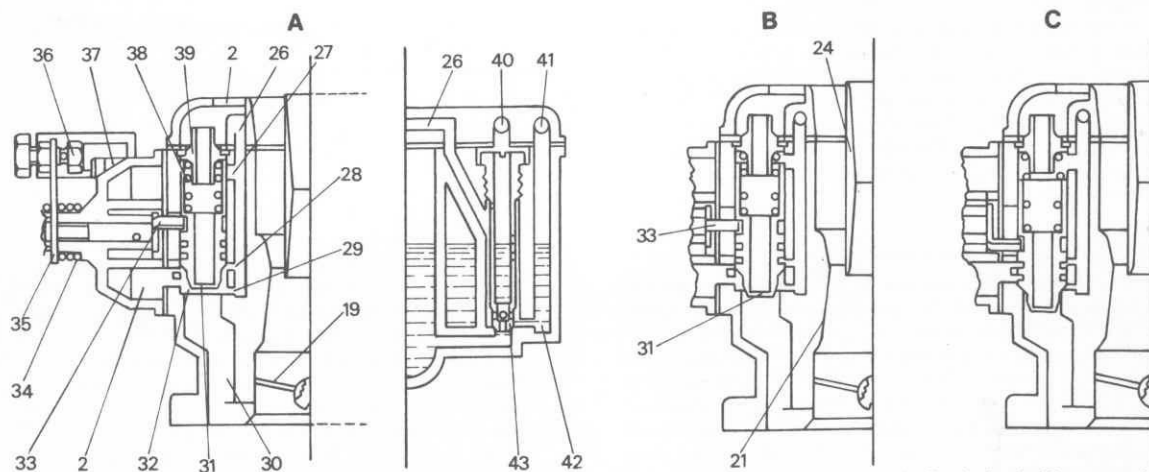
5 Sections through the carburettor choke starting device: A, choke fully engaged; B, choke half engaged; C, choke disengaged, normal running. Identification of the numbers will be found in the key FIG 2:4
